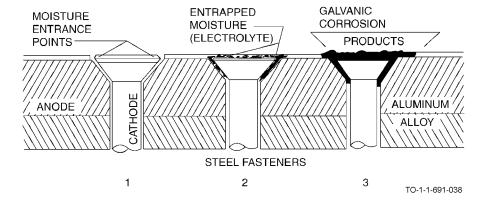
Galvanic Corrosion of Aluminum Adjacent to Steel Fasteners
